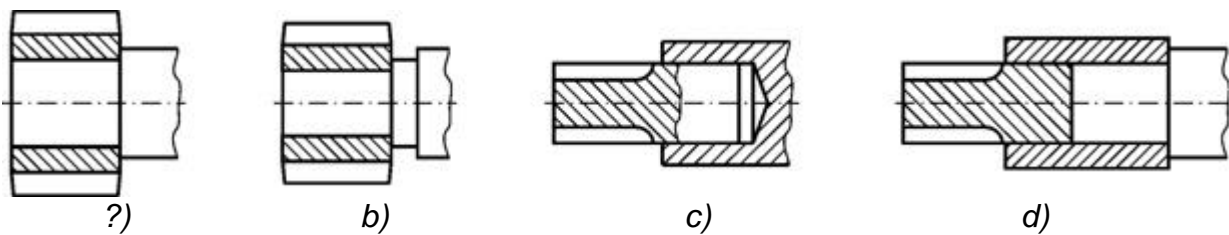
Typical concept design solutions of mounting pinion on shaft
